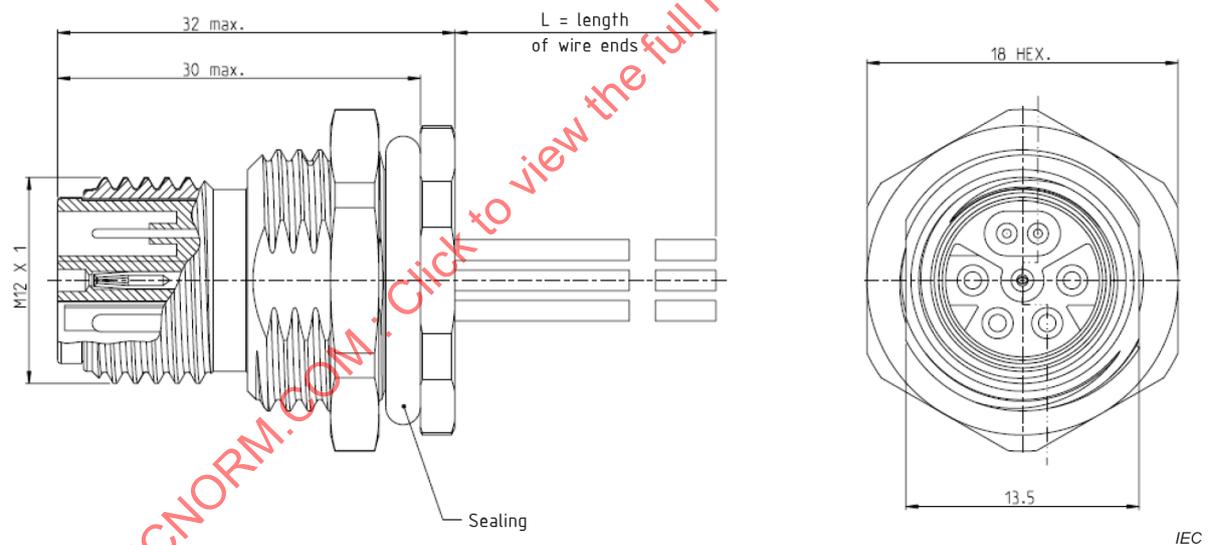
shows the overall dimensions of fixed connectors with female contacts, size 12, with relevant locking mechanism, intended for single-hole mounting.
